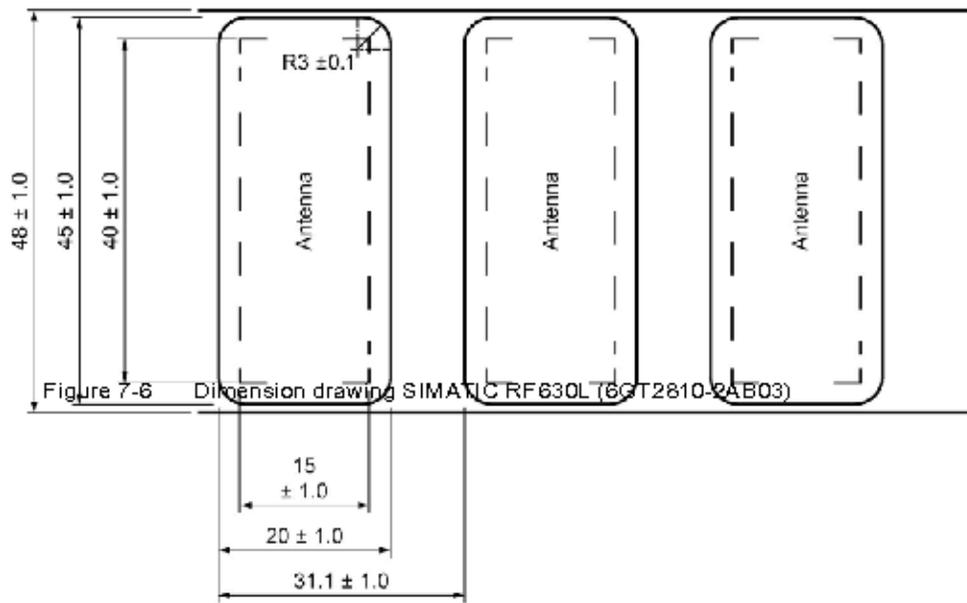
Dimension drawing SIMATIC RF630L (6GT2810-2AB03)
